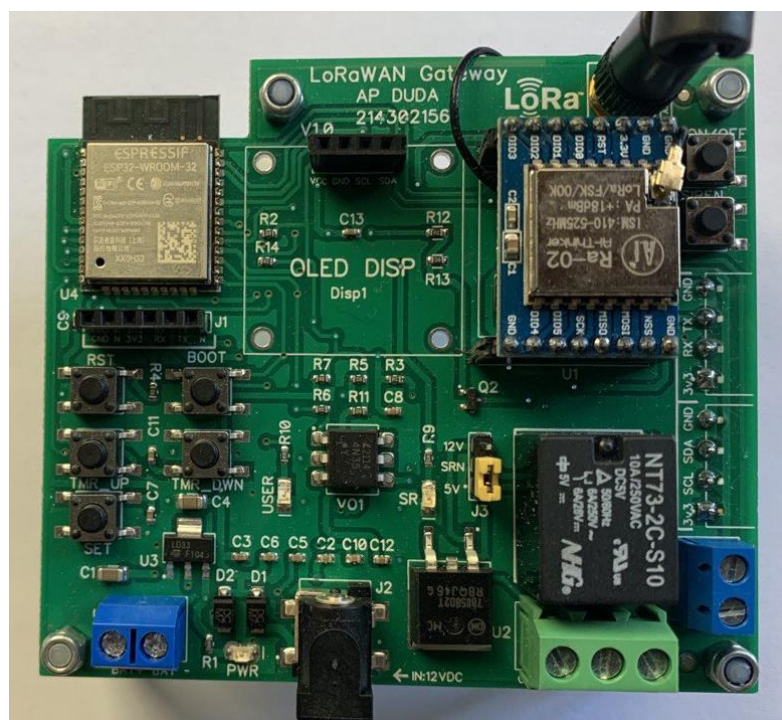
Completed LoRaWAN gateway PCB with all surface mount and through hole components assembled.
